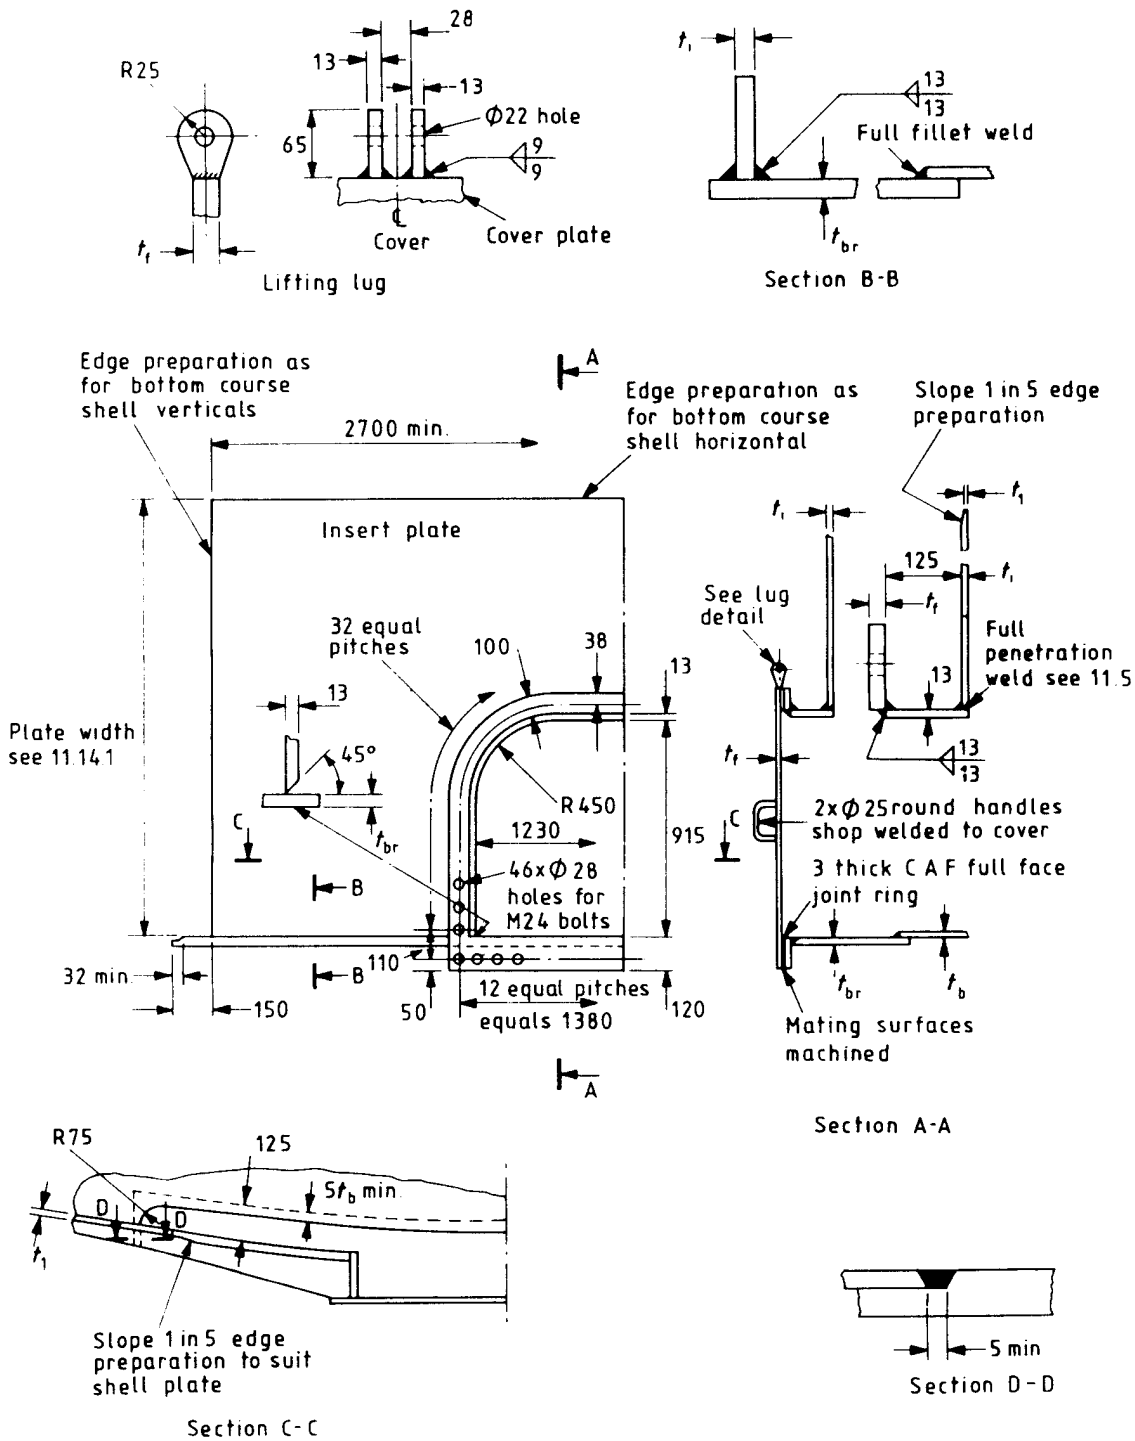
Flush type clean-out door with insert plate reinforcement (see 11.14.2)
